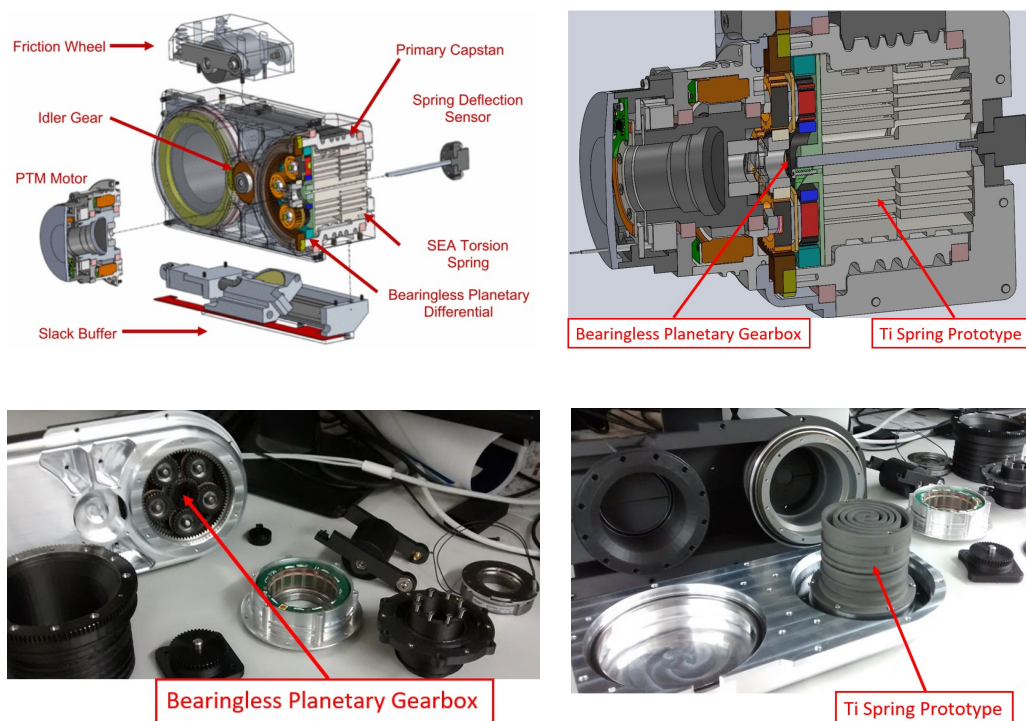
Axel primary tension module. Top: CAD section views of mechanism [36] ©2018 IEEE. Bottom: Photographs showing the components.
